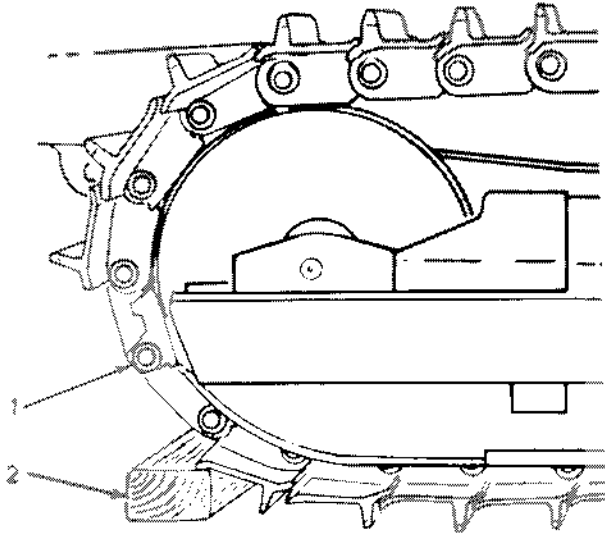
POSITION OF FORCING PIN FOR REMOVAL
